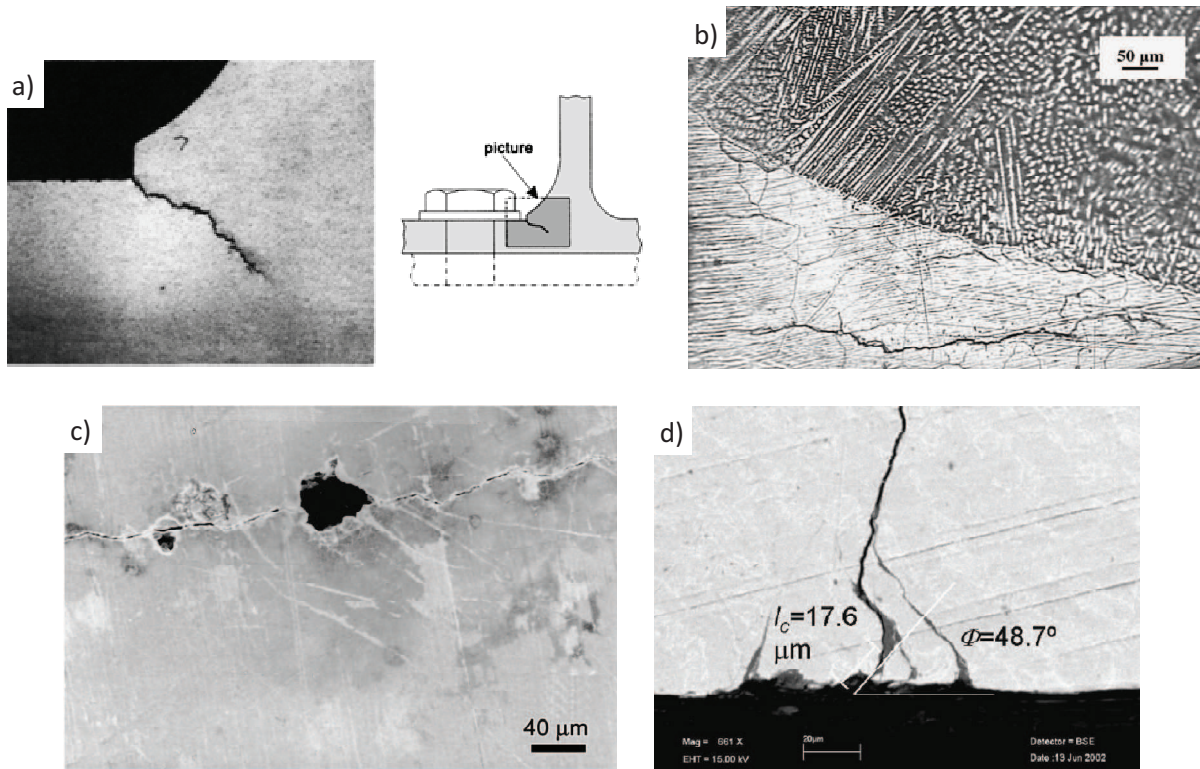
Various forms of fatigue cracks: a) Cross section of mechanical fatigue cracks at sharp corner [Schijve 09]; b) Thermomechanical fatigue crack near weld-base interface at  $823\text{ K} \pm 0.6\%$  [Prasad Reddy 08]; c) Corrosion fatigue crack crossing a pit [Xie 02]; d) Multiple fretting fatigue cracks emerging from the contact surface (at the bottom of the micrograph) [Conner 04].
